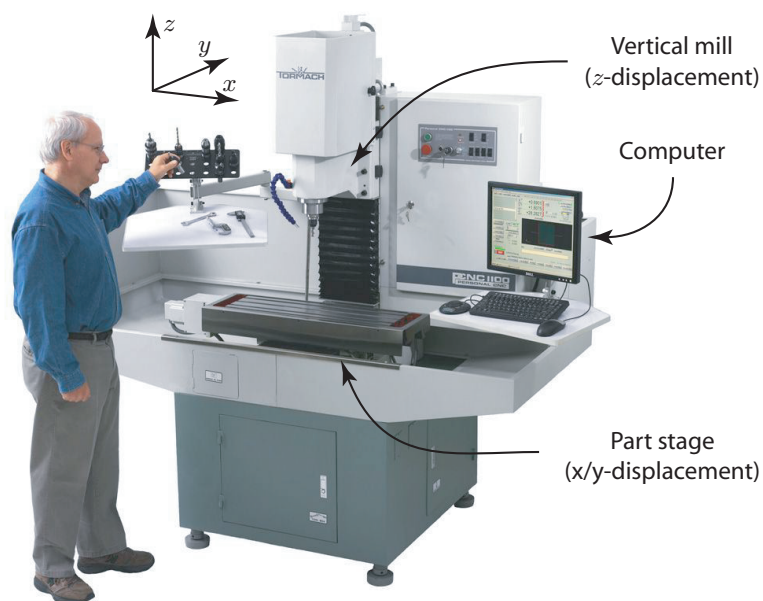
Linear three-axis CNC milling machine ([www.tormach.com](http://www.tormach.com)).
